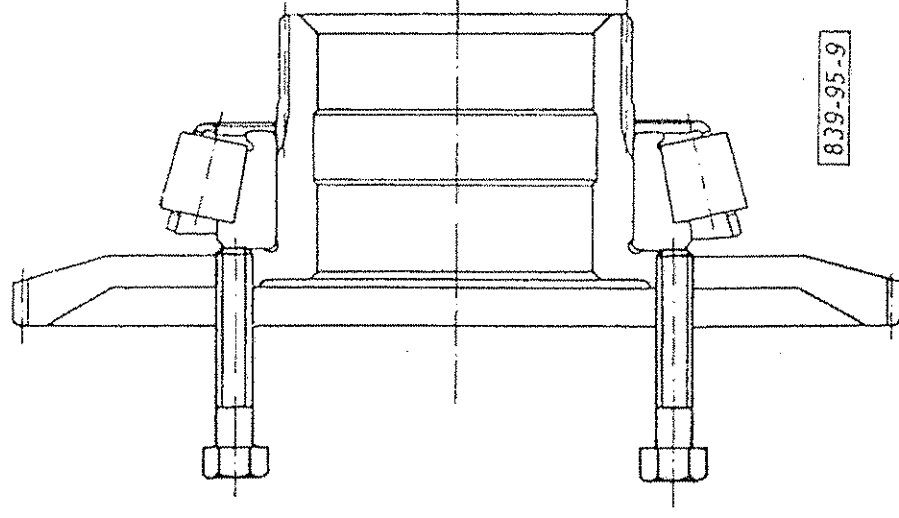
PRESSING OFF THE TAPER ROLLER BEARING INNER RACE
